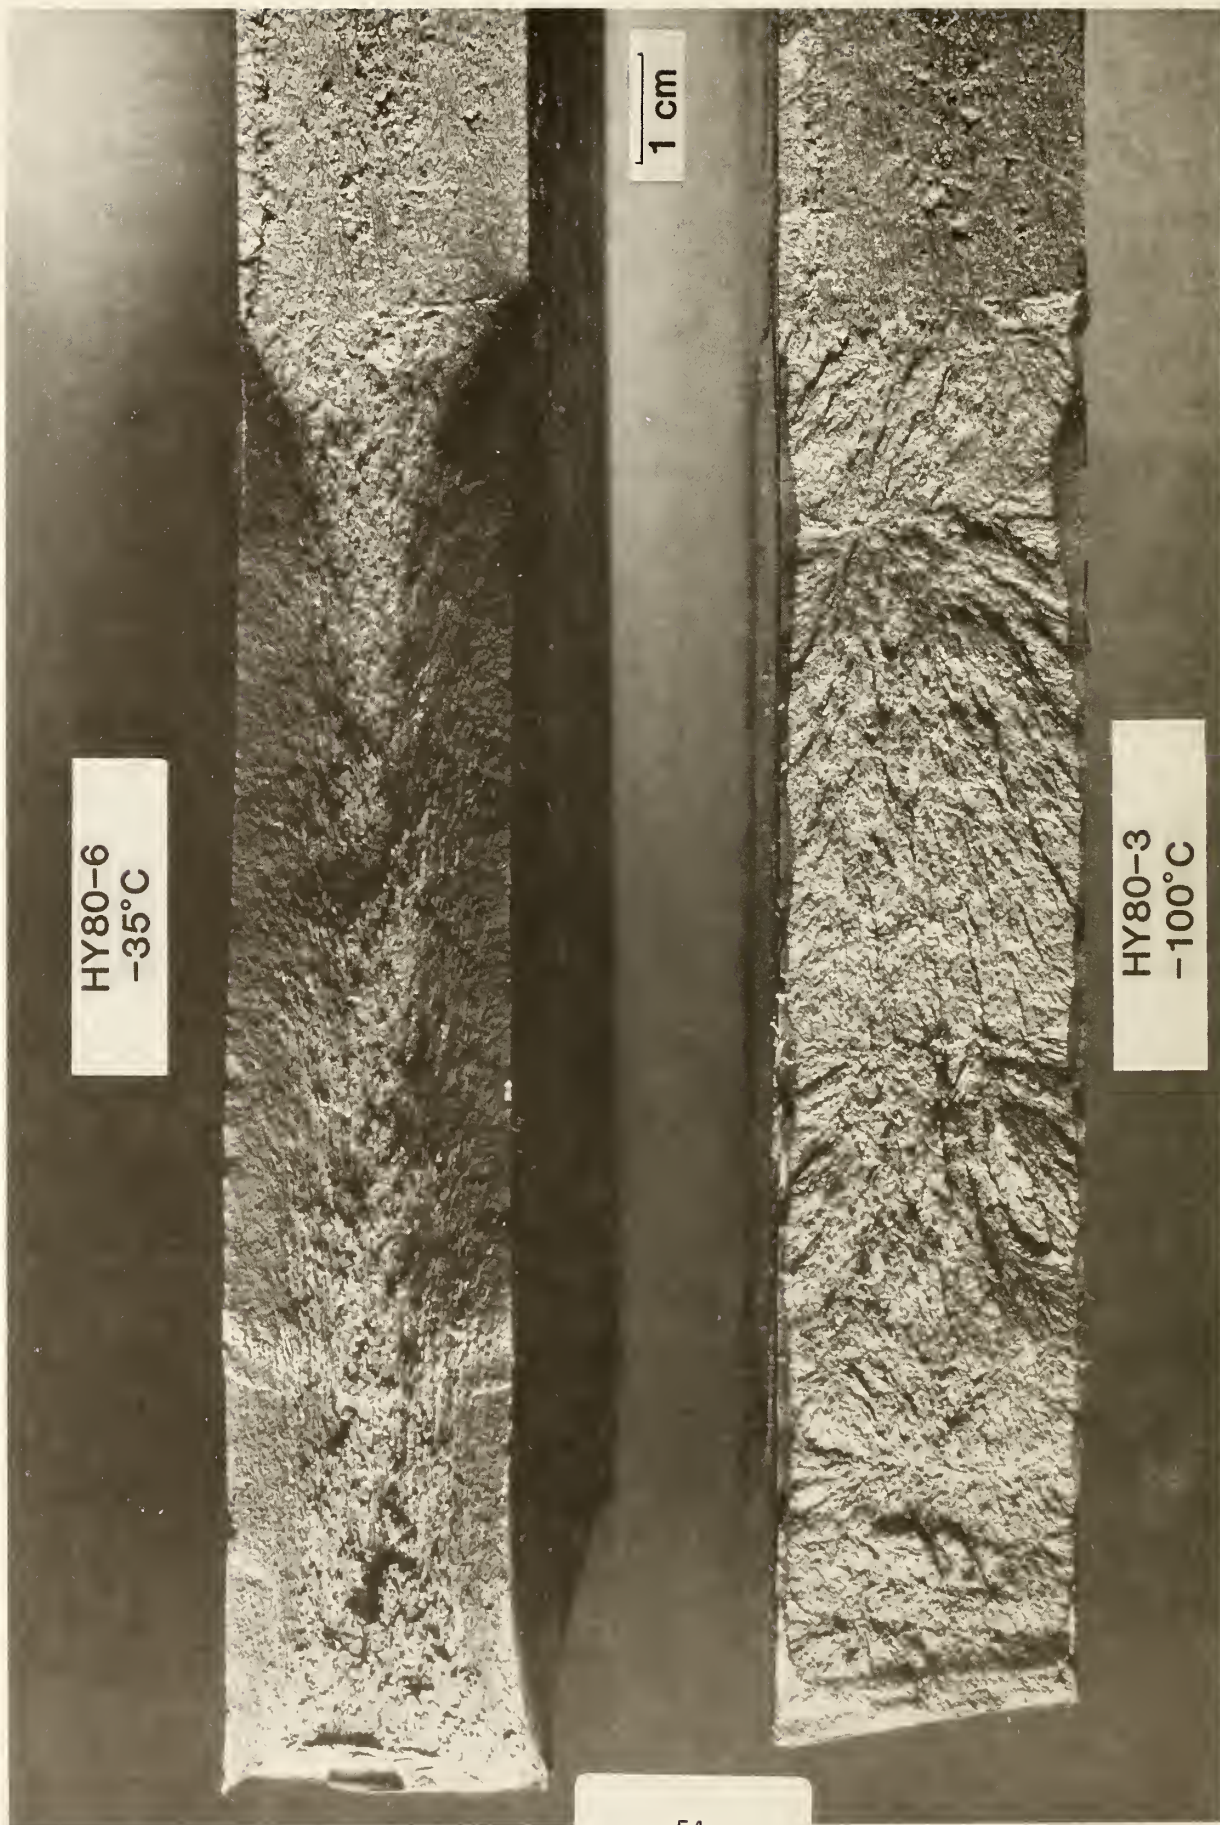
Typical fracture surfaces for HY80 DCB specimens.
